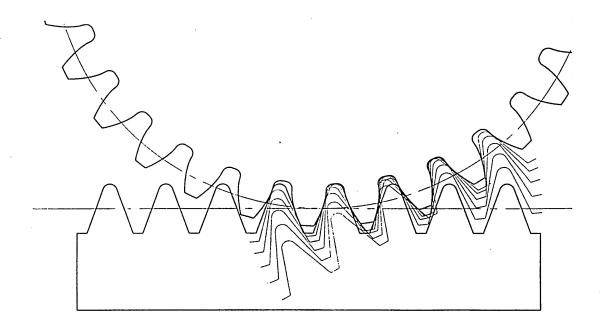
Generation of Gear Teeth by Rack Type Cutter
